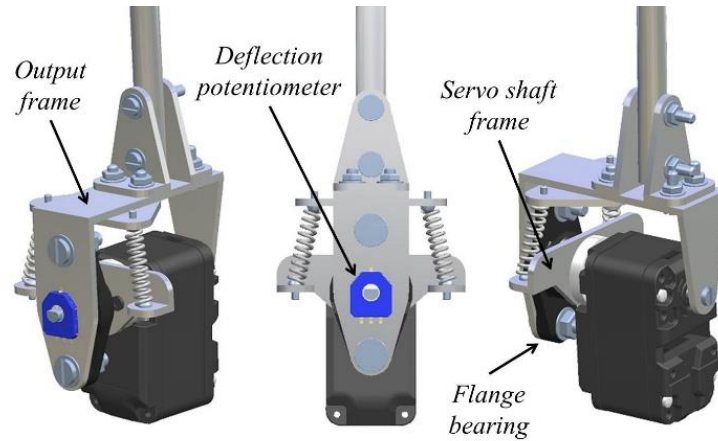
Rendered view of the compliant mechanism integrated in the shoulder and elbow pitch joints.
